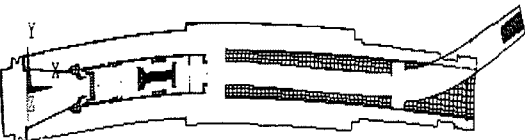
(d) 1st mode shape of the spindle and drawbar [899Hz]
